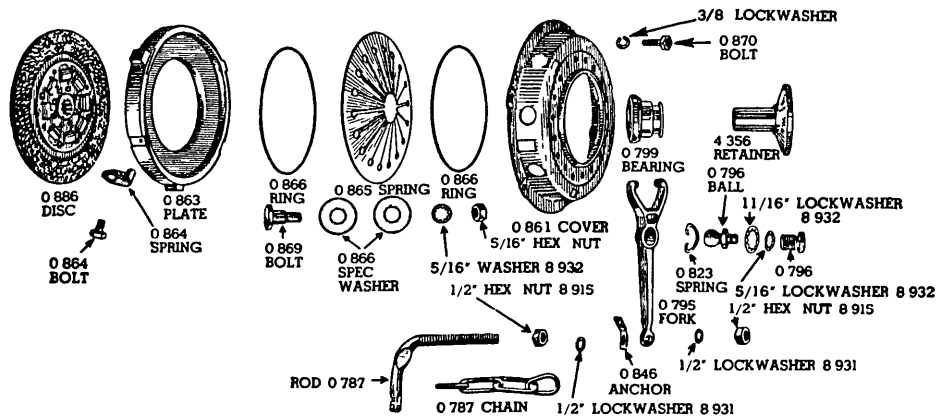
Inland diaphragm spring type clutch. Chevrolet 1938 sh wn
